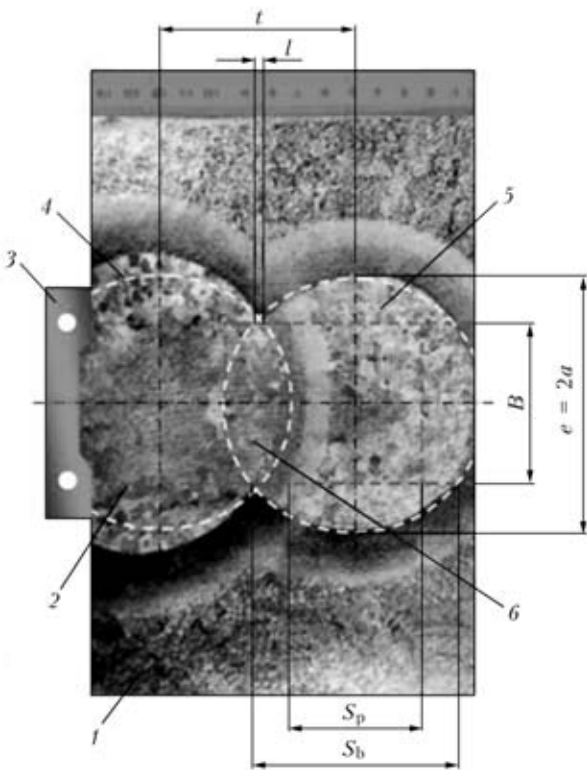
Transverse macrosection of a fragment of multilayer electroslag weld: 1 – workpieces welded; 2 – shape of groove for MESW; 3 – water-cooled shaping device; 4 – calculated shape of fusion line (zone); 5 – weld layer; 6 – shaping spacer plate
